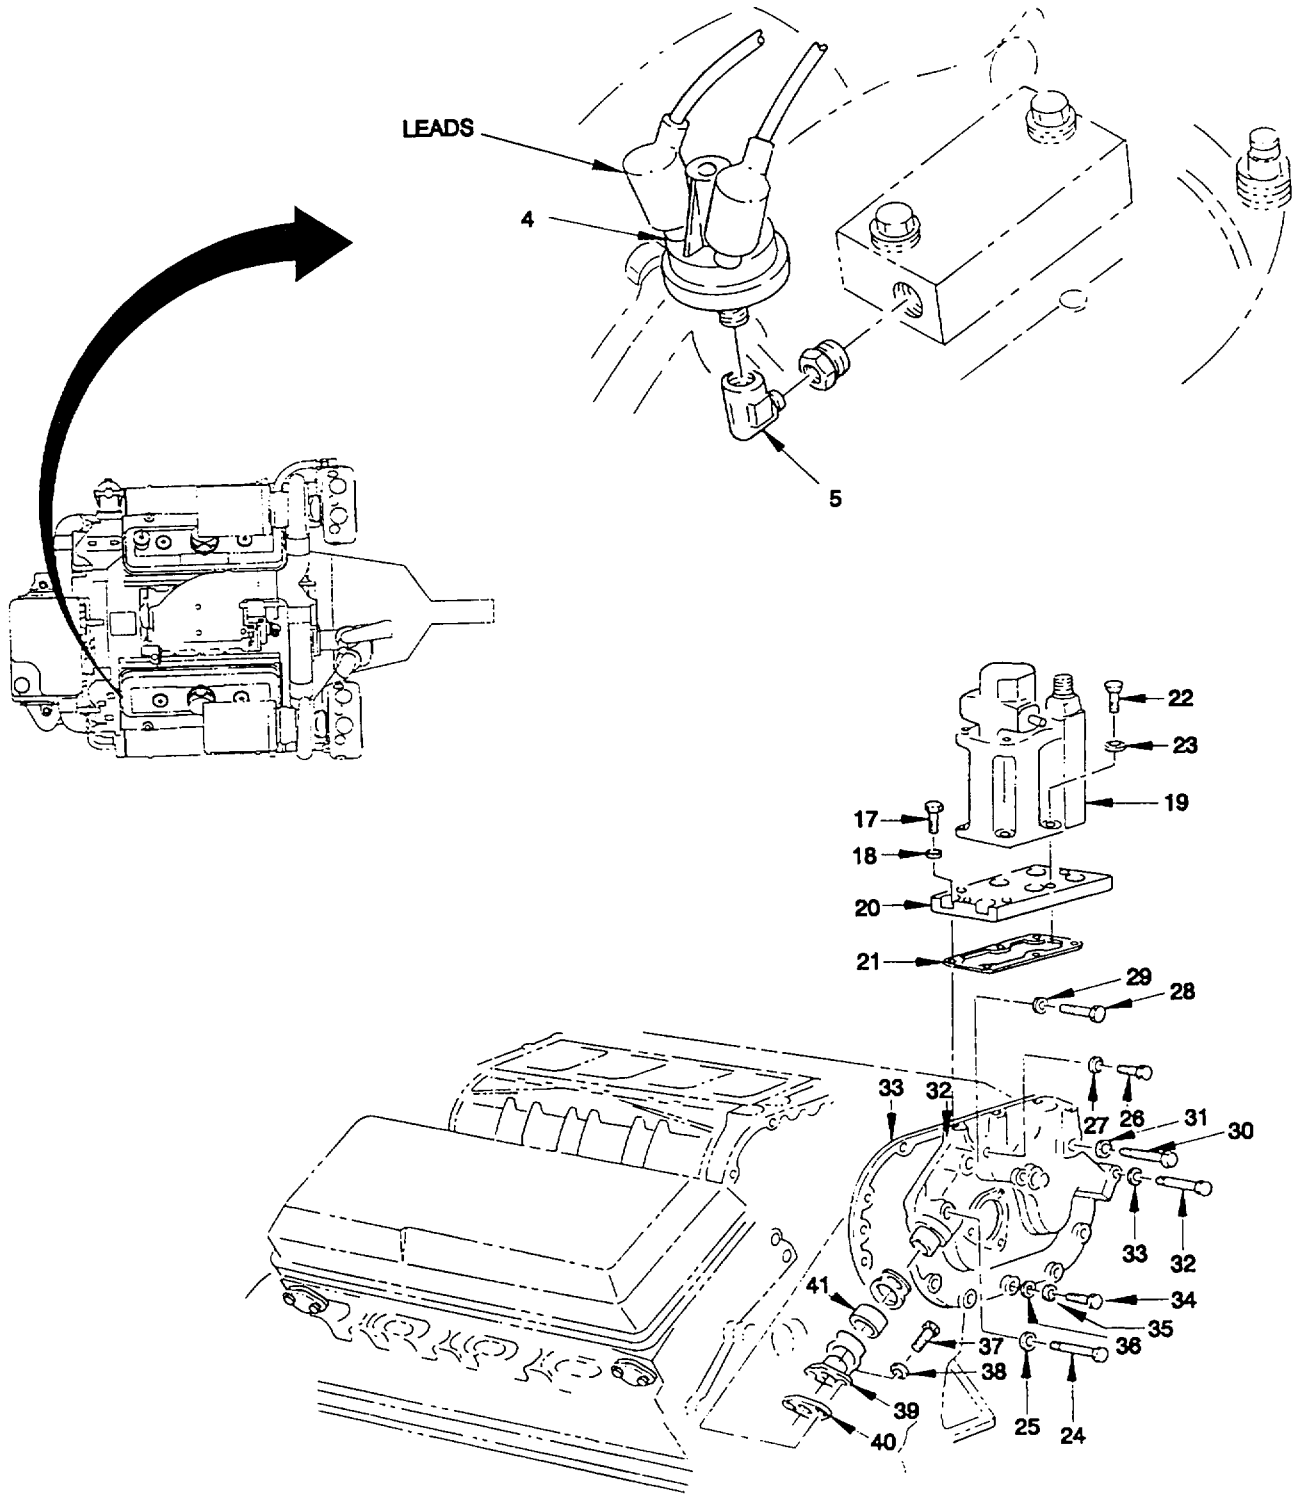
Electronic Governor Controller, Engine Junction Box Assembly "A4", Remove/Install (Sheet 2 of 3).
